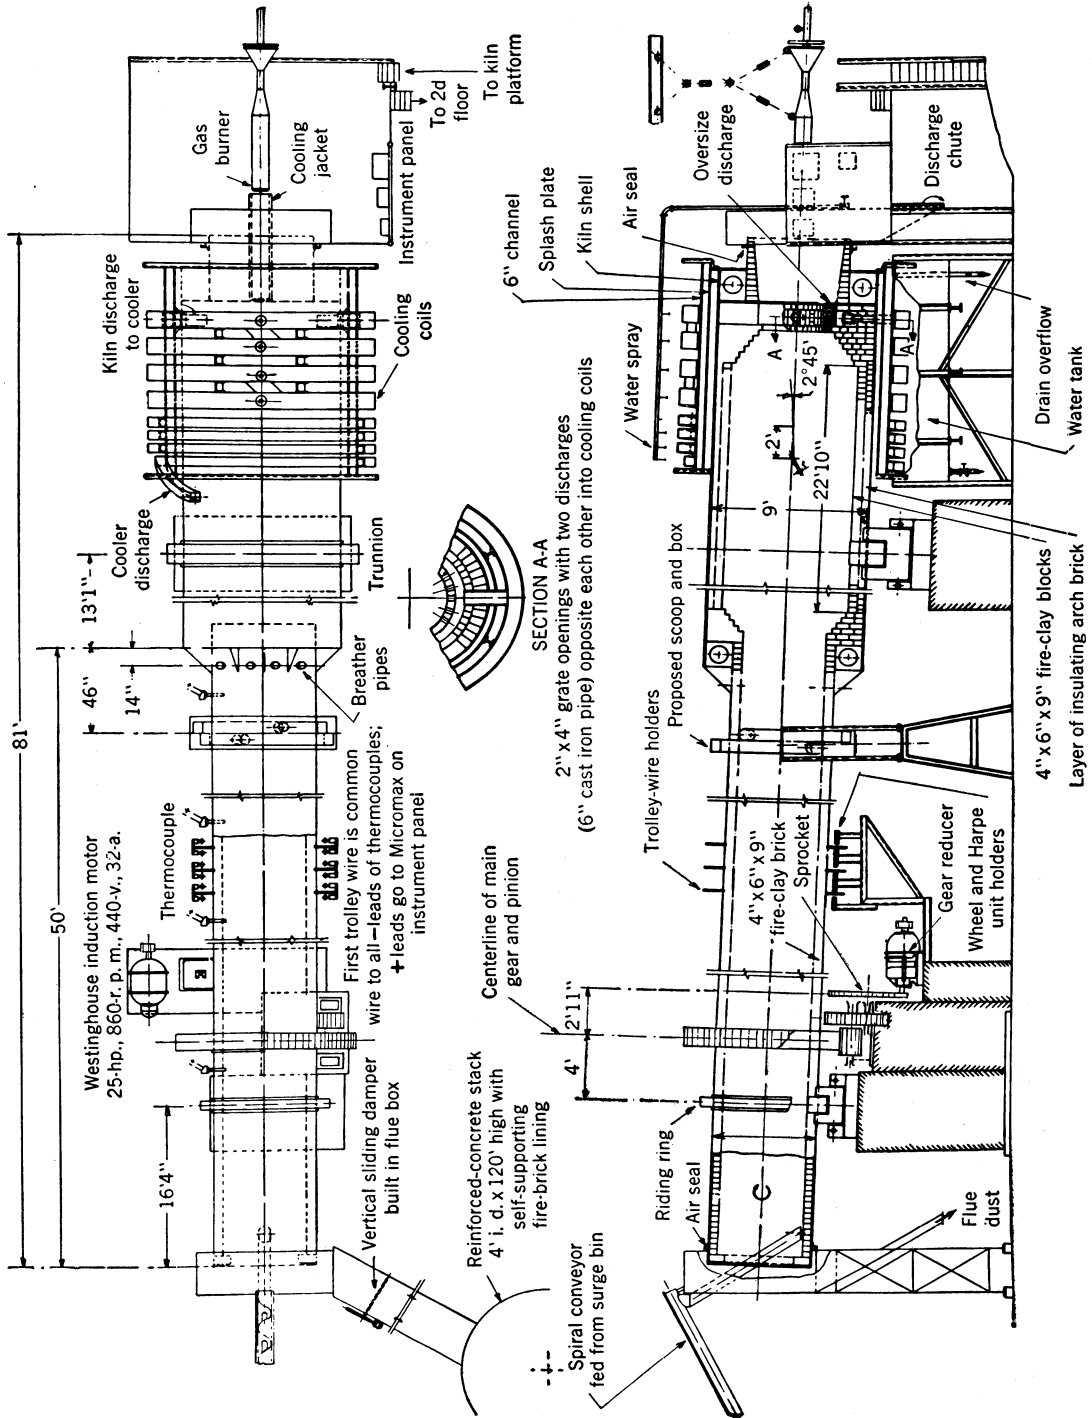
DETAIL DRAWING OF TWO-DIAMETER ROTARY KILN.
